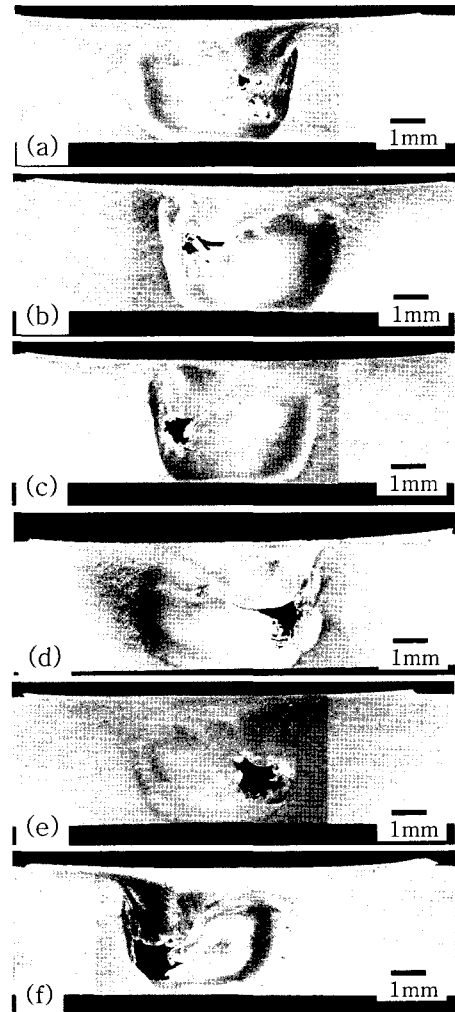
Macrostructures of weld zone at various welding speeds. (a) 87mm/min, (b) 127mm/min, (c) 187mm/min, (d) 267mm/min, (e) 342mm/min, (f) 507mm/min
